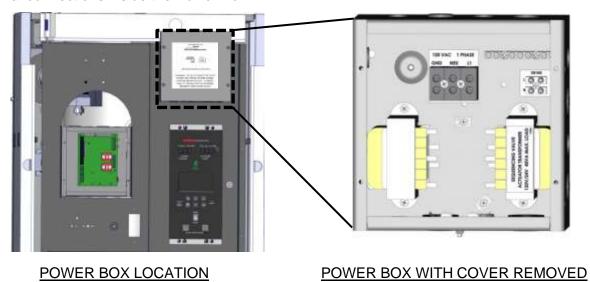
Power Box Location - Partial Front View, Front Panel Removed
